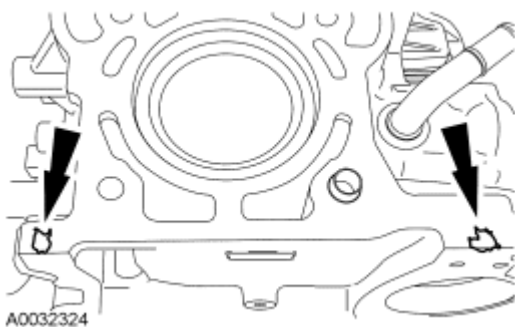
Identifying Cylinder Head Alignment Dowels
